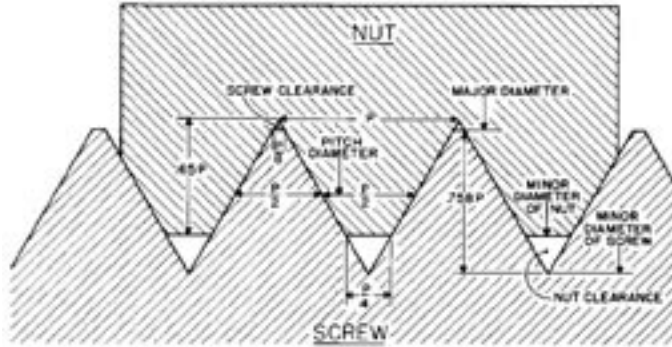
Component parts of a thread cut with a sharp pointed 60° Vee tool.
